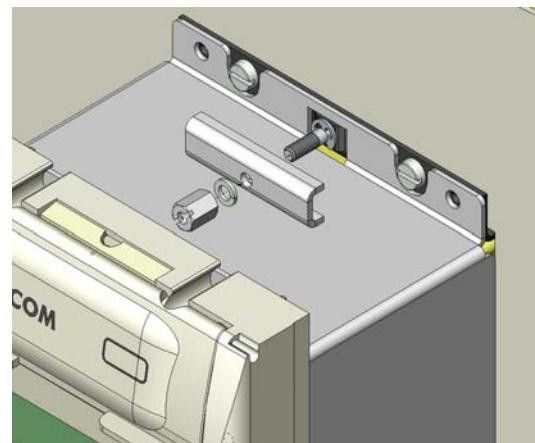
Alternative fixing using M4 Taptite self tapping screws (4 off) panel hole size Ø3.4
